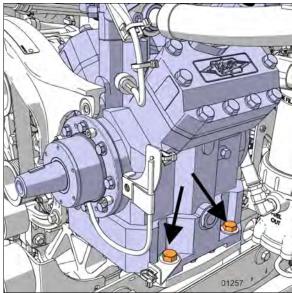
COMPRESSOR MOUNTING BOLTS
